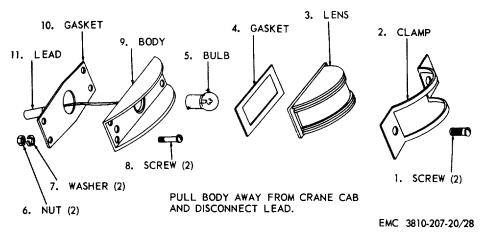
Clearance light, removal, disassembly, reassembly, and installation.
